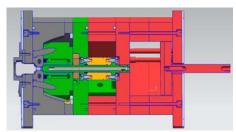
CAD drawing of the constructed mould with built-in force sensor (orange). The moulded thermoplastic part is the blue part around a cylindrical core.
